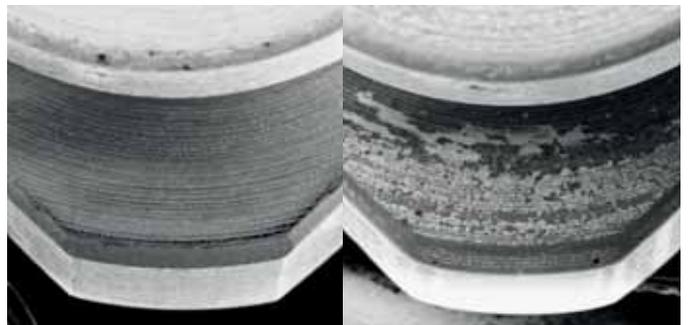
Turned stainless steel surface. Left: sharp tool and adjusted machining parameters lead to a regular surface finish. Right: worn tool and high cutting forces lead to smearing of the surface/ irregular finish with reduced corrosion resistance, flaking and poor diffusion behaviour.
